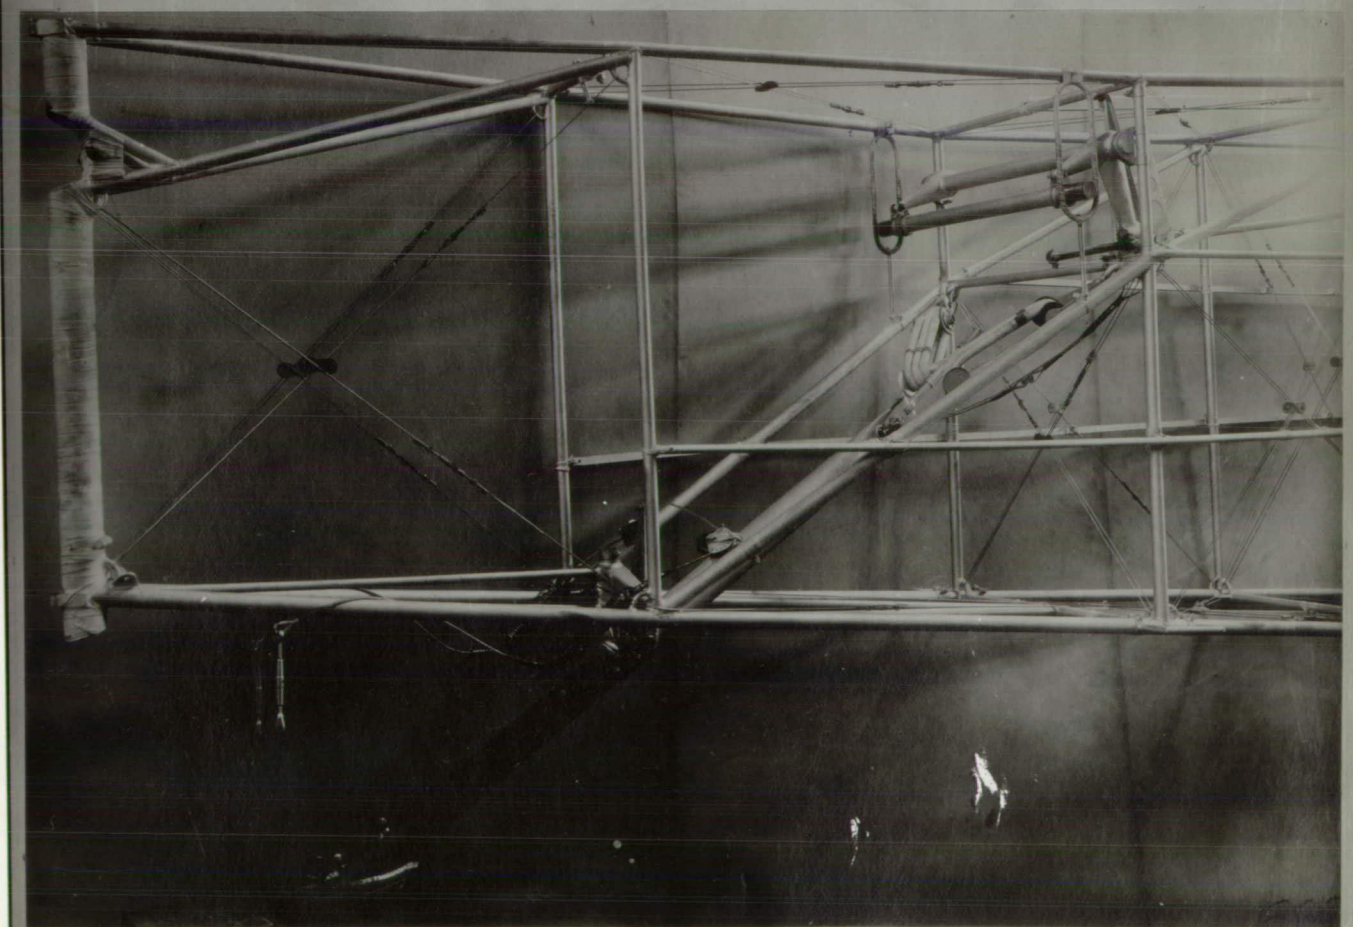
Enlarged view of the fuselage framework showing stabilizer adjusting device and steerable tail skid for the "Universal" airplane.
